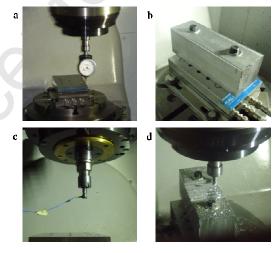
Tests set-up (a) dynamometer (b) workpiece (c) tool (d) slotting tests
